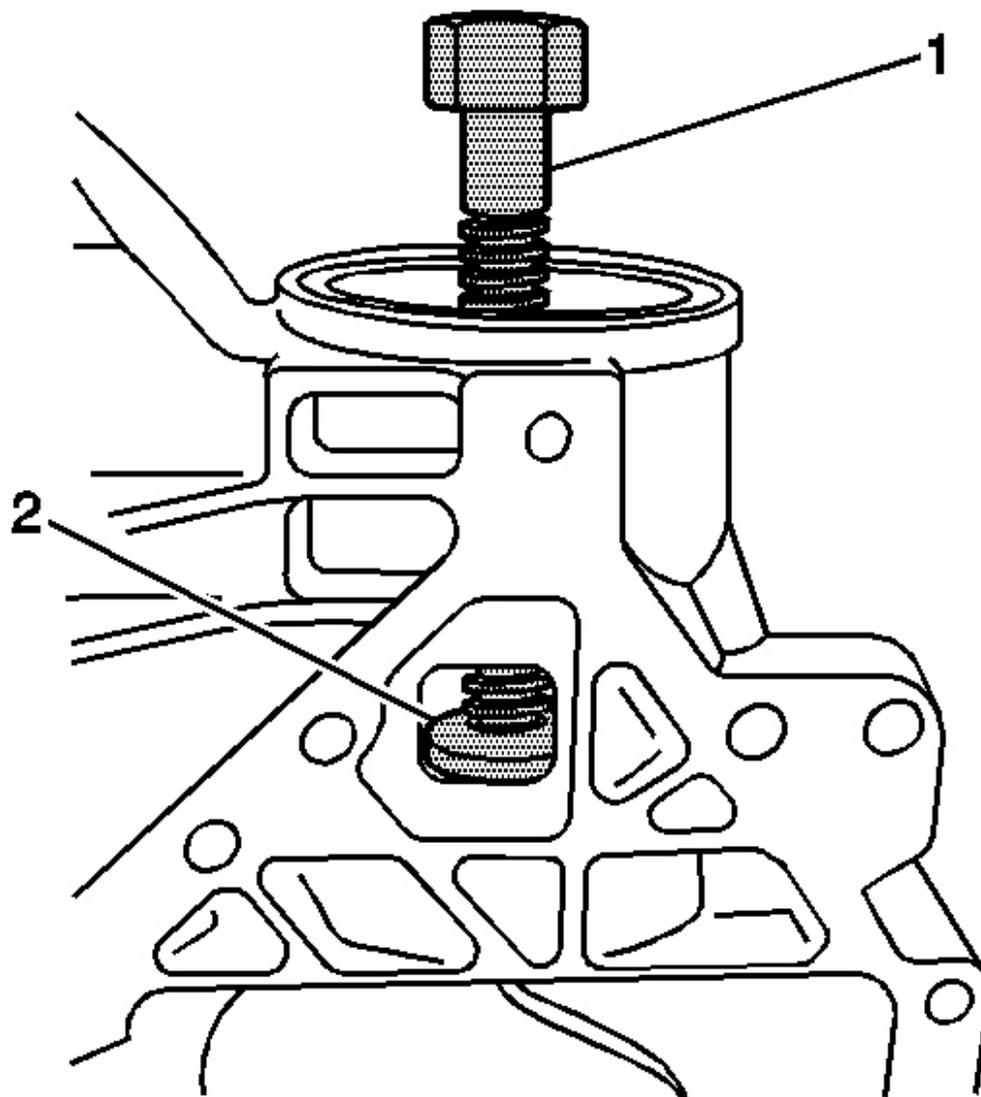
Installing Forcing Screw Of J 45754 Into J 45754-3
